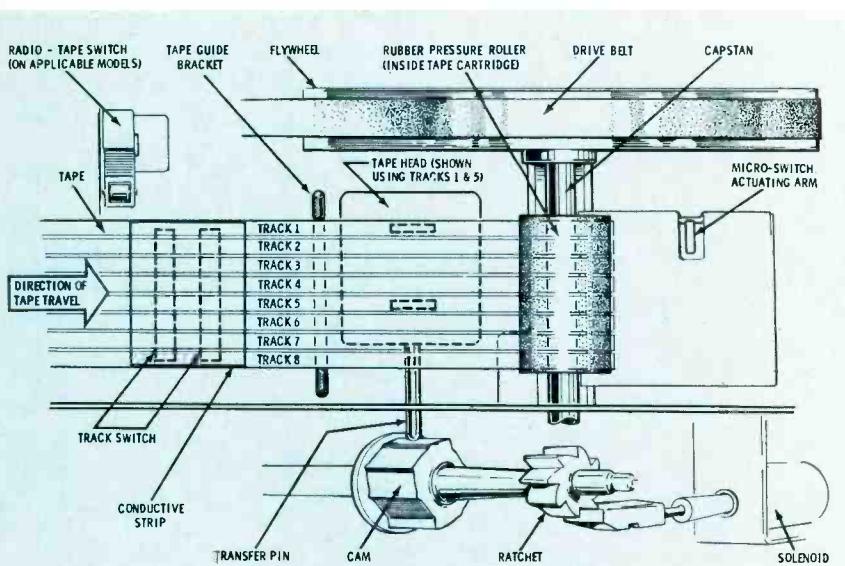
Tape drive and head positioning details of Motorola tape-player.
